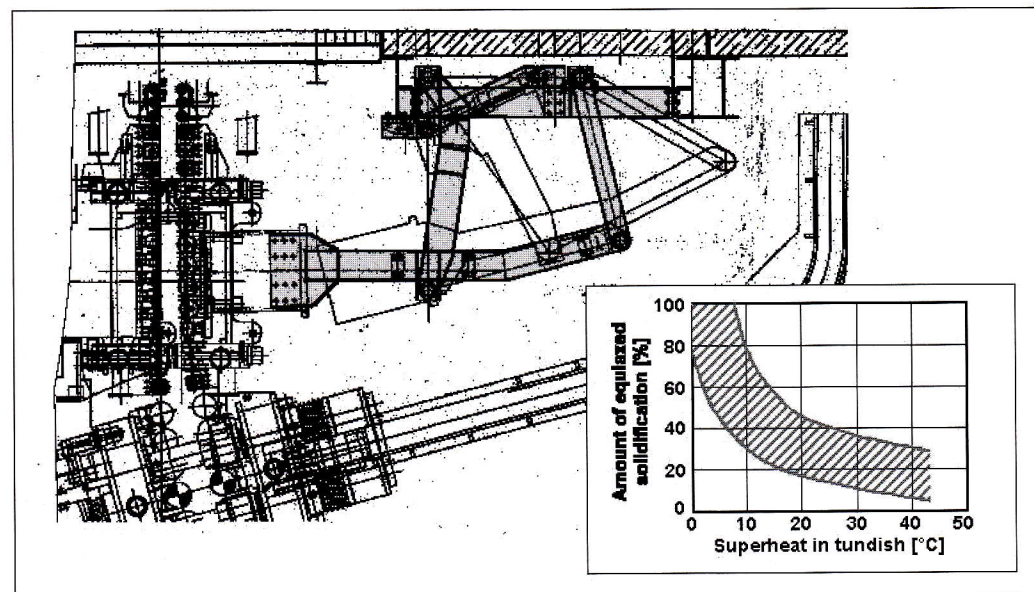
Positioning of Electromagnetic Strand Stirring in Slab Caster.
